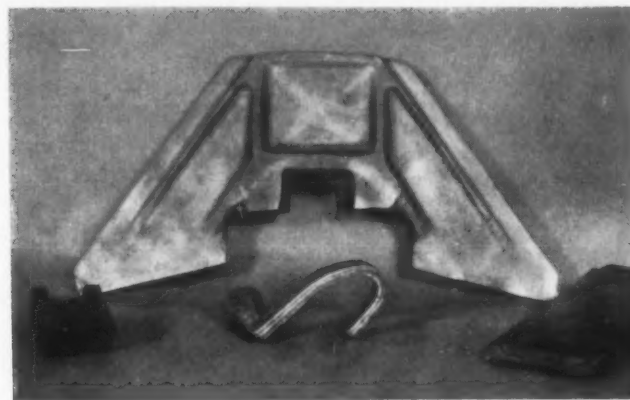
Four castings shown include: motor mount casting in 410 stainless (background); hook shaped piece of high temperature alloy bent as-cast; super hard blade for blast cleaner (right foreground); and casting from which expendable aluminum core was removed (left foreground).
